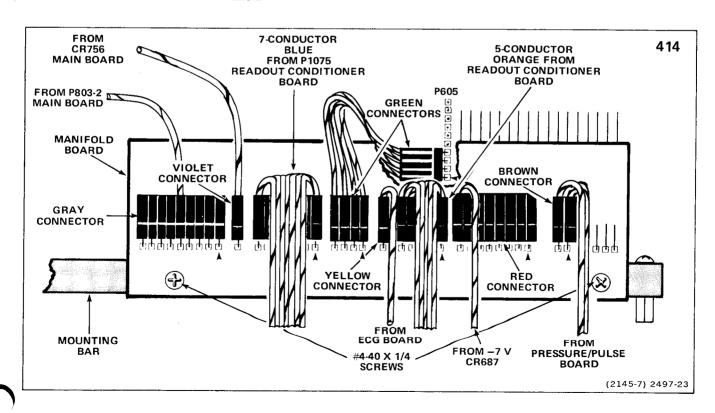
Installing Manifold board and connecting cables in Standard 414 Monitor.
